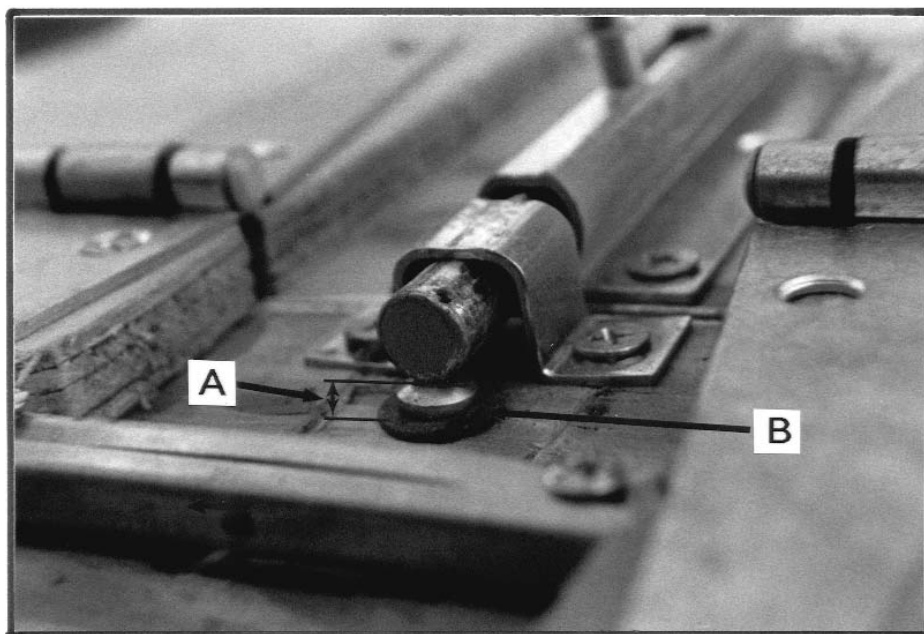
Adjusting screw and washer used to remove play between the barrel bolt and its strap to stiffen the two halves of a 2-meter board when unfolded. (A) Measure distance between the bolt and the board. (B) Insert a round headed sheet metal screw with enough washers to make the bolt fit firmly under the strap. Sheet metal screws are preferred because of their hardness. Pound the flange down if necessary.
